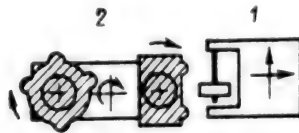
Layout for Trimming Castings by Pendulum Manipulator
